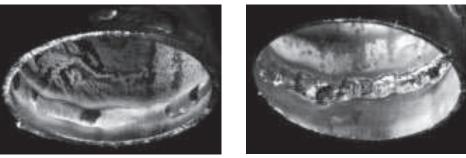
Root surface appearance of 321 stainless manual GTA welds made with backing gas (left), and without backing gas (right).
